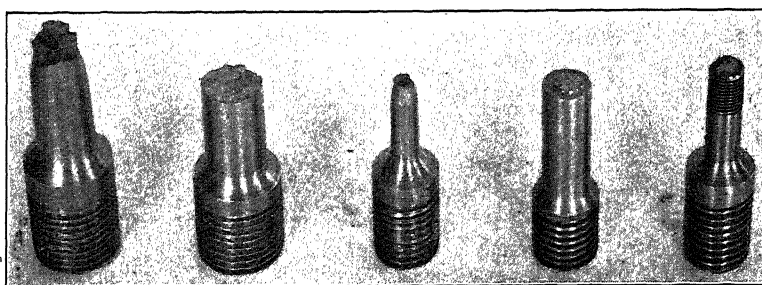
TYPE BARS FROM DEFECTIVE FORGING.
